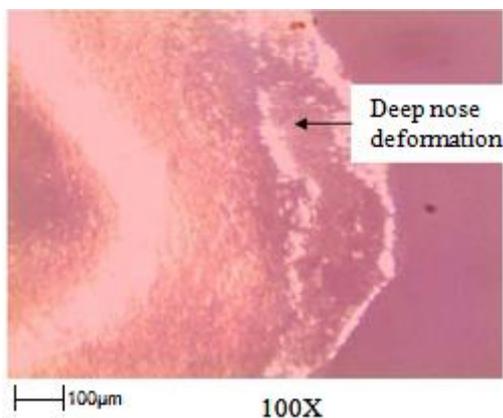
Carbide insert after machining at cutting speed of 240 m/min
